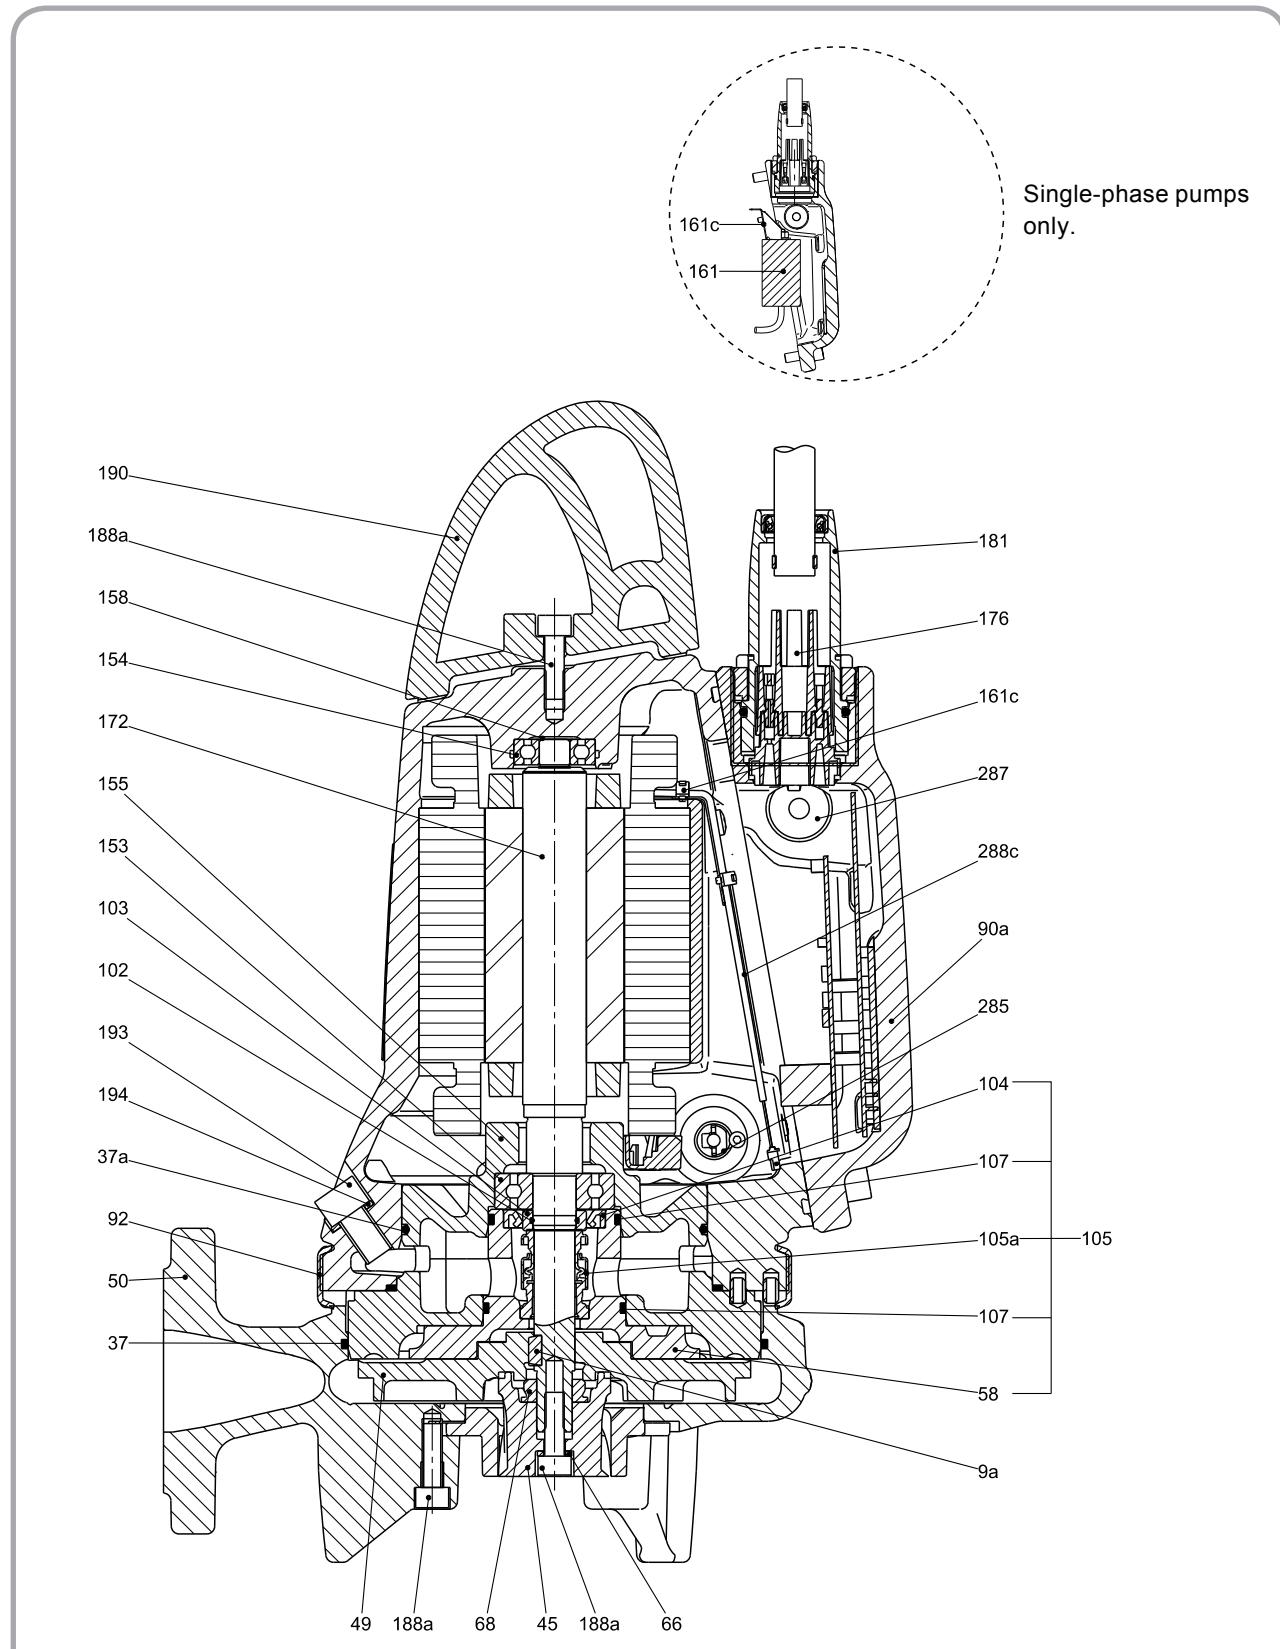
Sectional drawing of SEG AUTO_{ADAPT} pumps, 0.9, 1.2 and 1.5 kW
